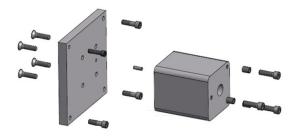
Pelvis Bottom Fixture Assembly (TRA-370)
